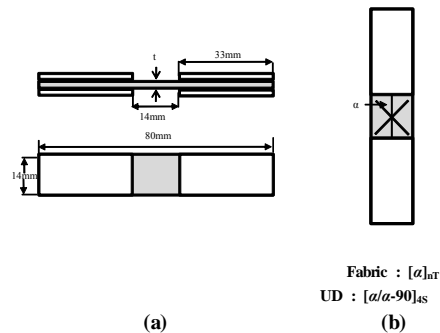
Specimens for the compression test; (a) shape and dimensions of the specimen, (b) bias specimen.
